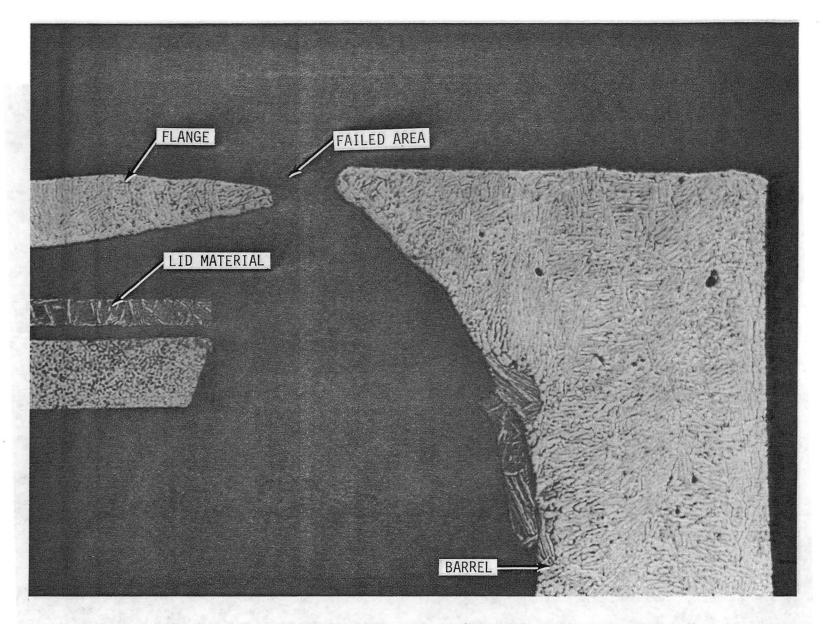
Photomicrograph Shows Over-machining of Fastener Insert Flange
